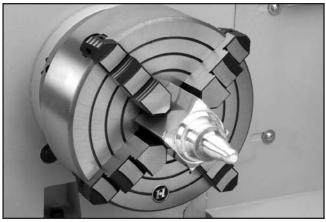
Example of non-cylindrical workpiece correctly mounted on the 4-jaw chuck.
